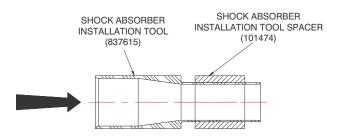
Assemble Spacer and Shock Absorber Installation Tool
